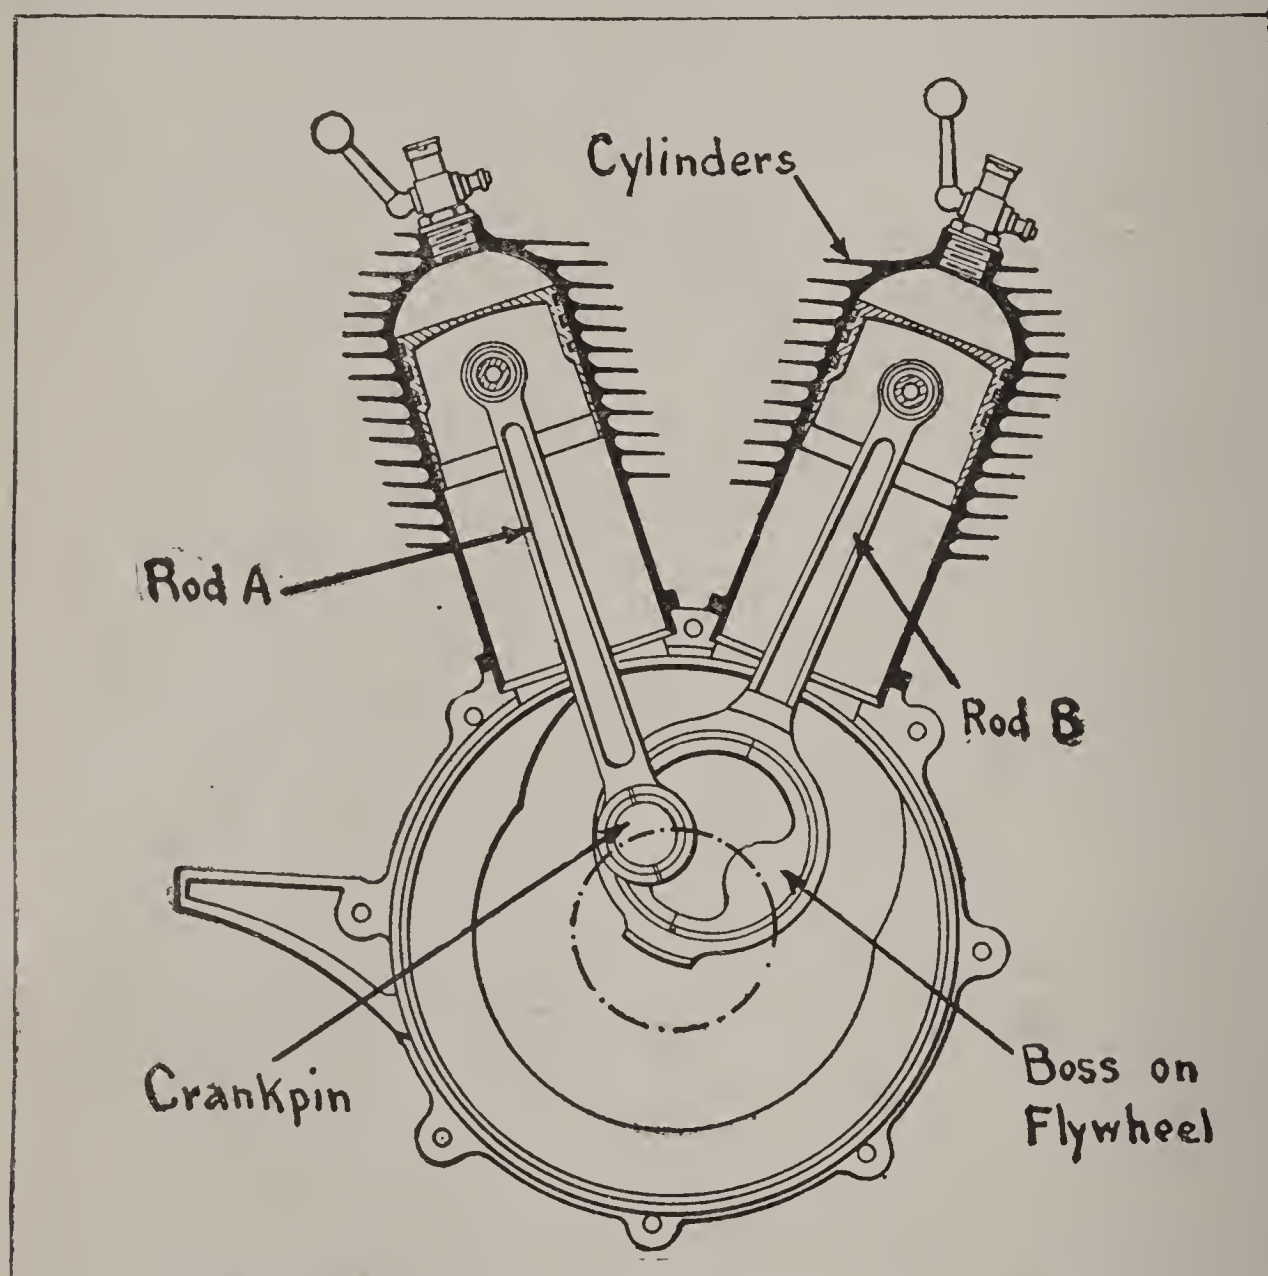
Diagram Showing How Premier Connecting Rod Arrangement Permits Both Pistons to Reach the Top or Bottom of the Stroke Simultaneously.
